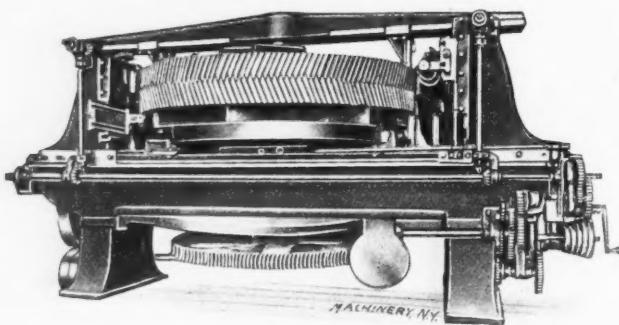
Machine for Cutting Solid Herring-bone Gears by the Wust Process.
